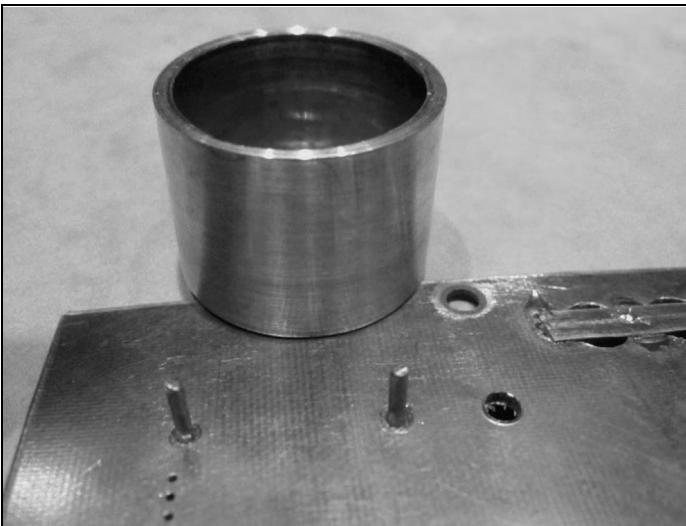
The PCB cavity oscillator being assembled. The cylindrical resonator is soldered with hot air onto the ground side of the RT Duroid PCB. The component side only contains a 50Ω stripline with breaks for the MMICs.
